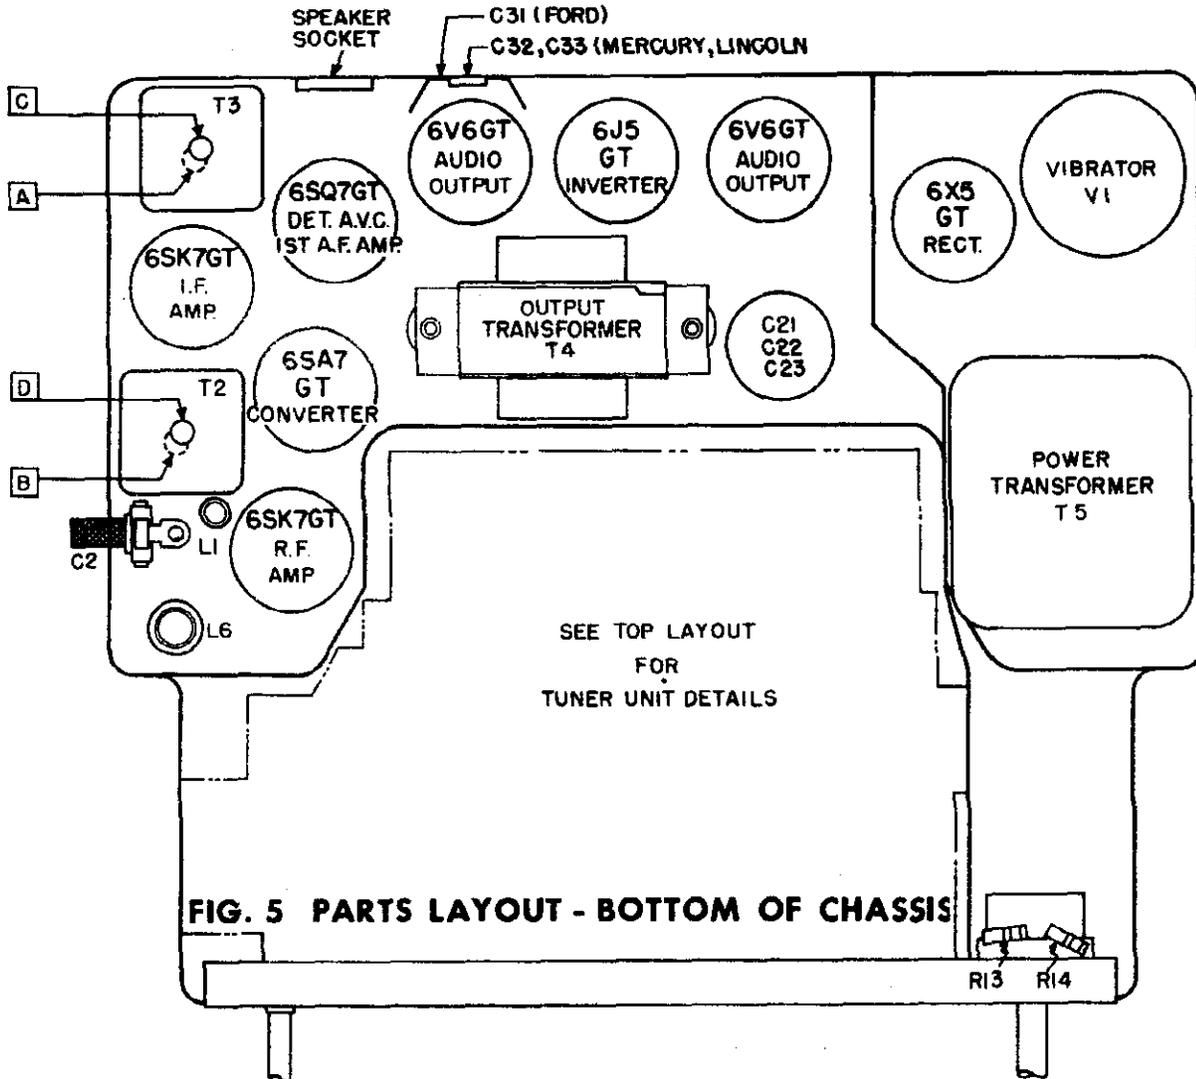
PARTS LAYOUT - BOTTOM OF CHASSIS
